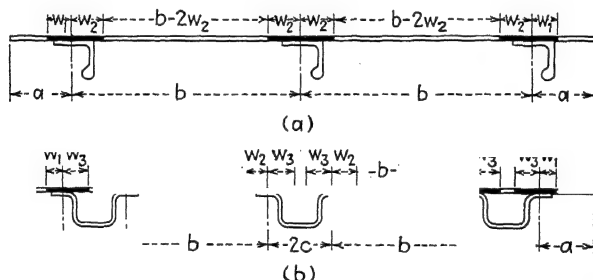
12.—Effective widths of sheet for sheet-stiffener combinations. (a) Panel with stiffeners having a single line of connection to the sheet. (b) Panel with stiffeners having a double line of connection to the sheet.
